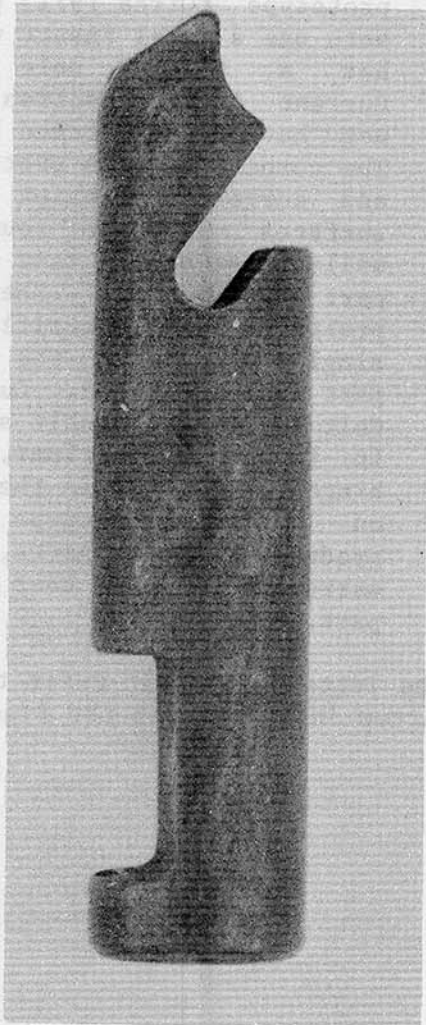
Butt cap screw side-view showing type of thread lock.
